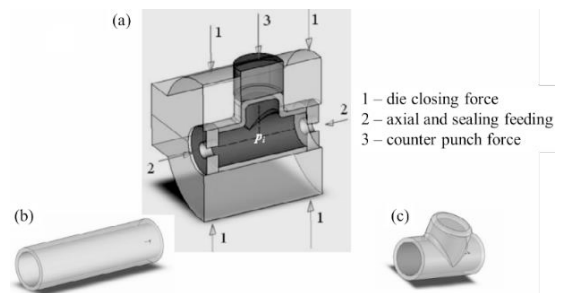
The hydroforming principles [19]: (a) tool setup; (b) initial tube; (c) final product (T-joint).
